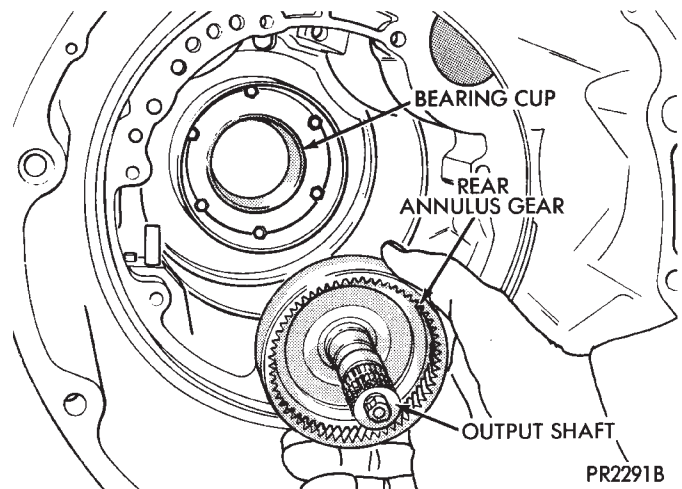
Remove Output Shaft and Rear Annulus Gear Assembly
